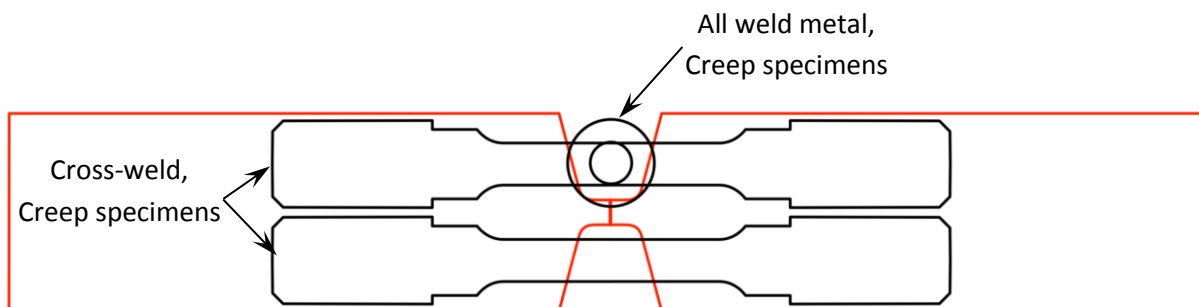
Schematic of the weld joint design to be used for the rest of this project. Schematics of where the creep specimen, cross weld and all-weld metal specimens, will be taken are super-imposed on the weld.
